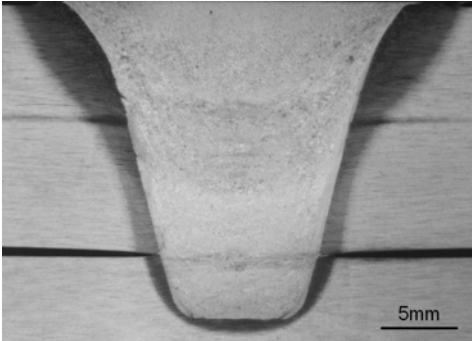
Macrograph of a single FHPP sleeve weld [100].
